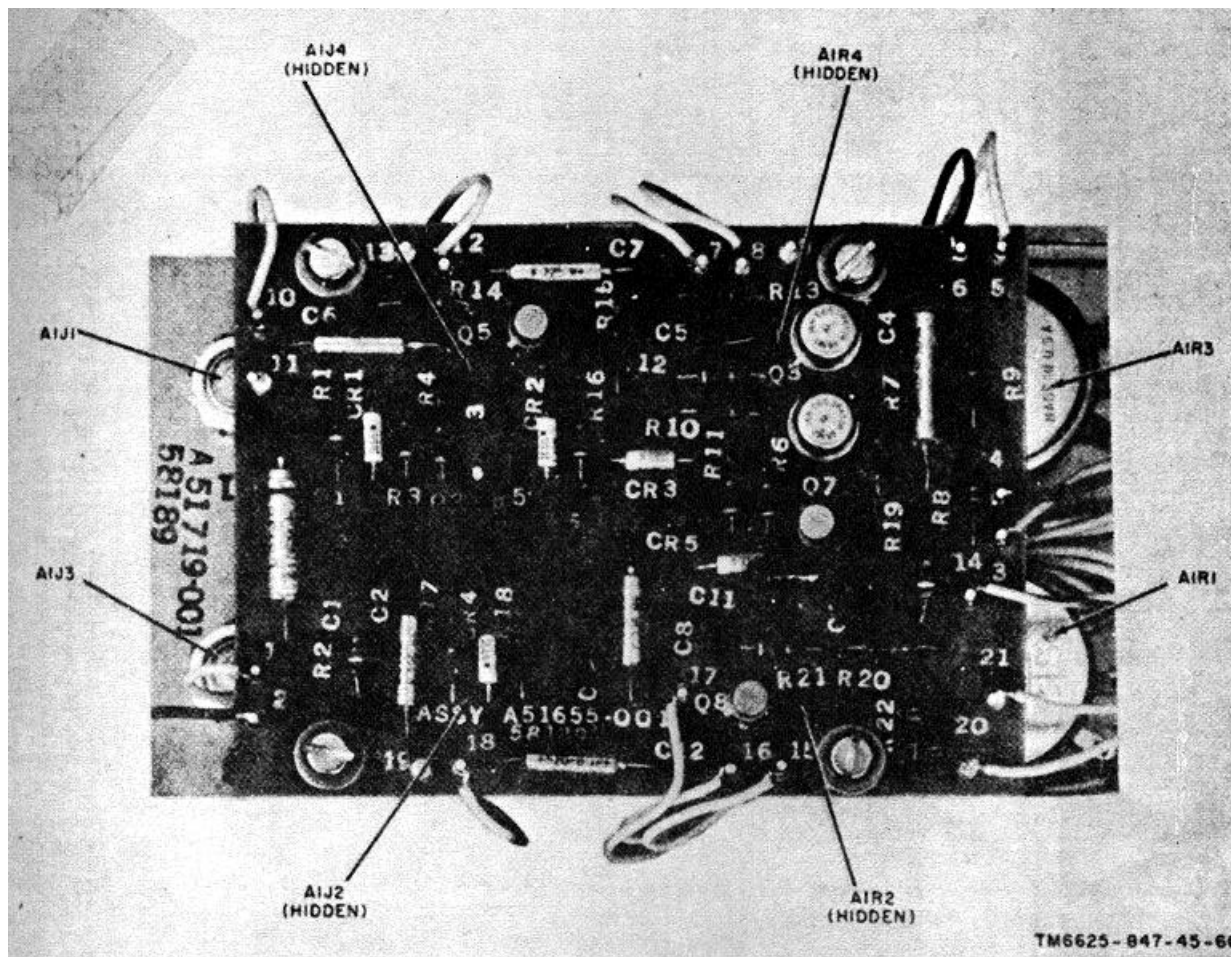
Test set A2, pulse generator assembly A1A1.
